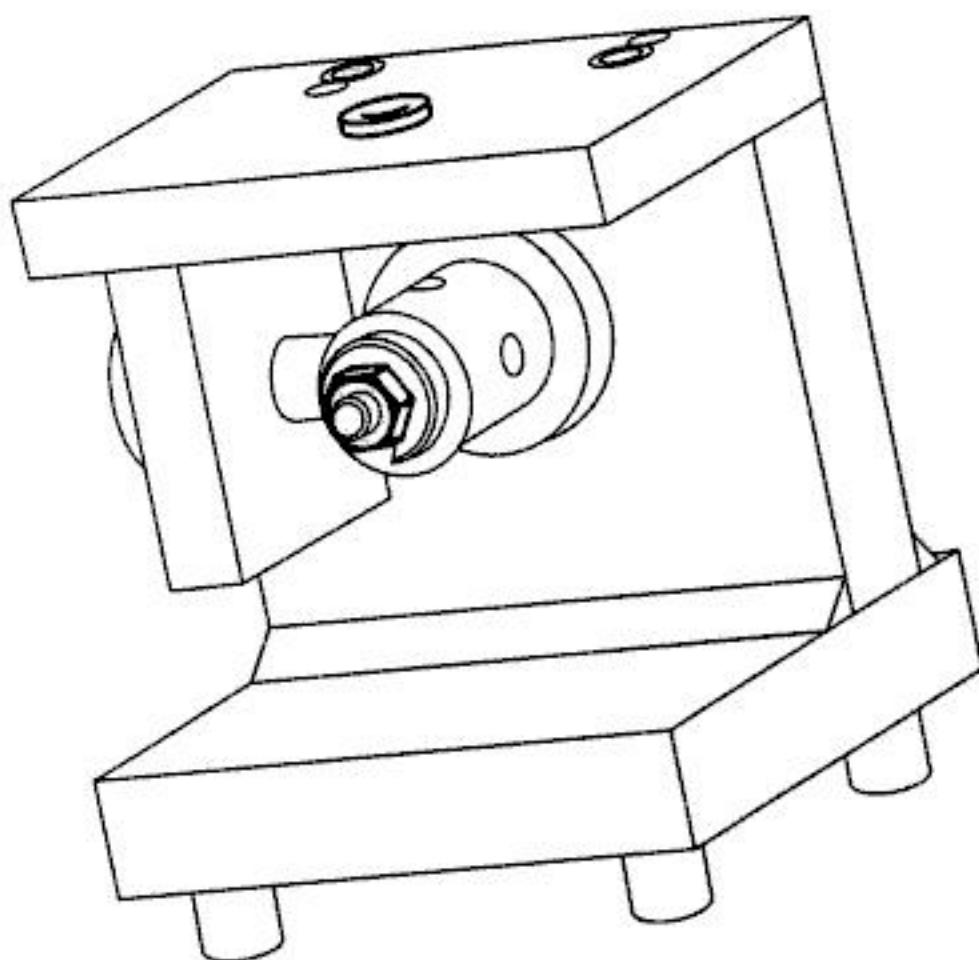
Completed jig with a sample part loaded in the jig for the part shown in Fig. 14.48
